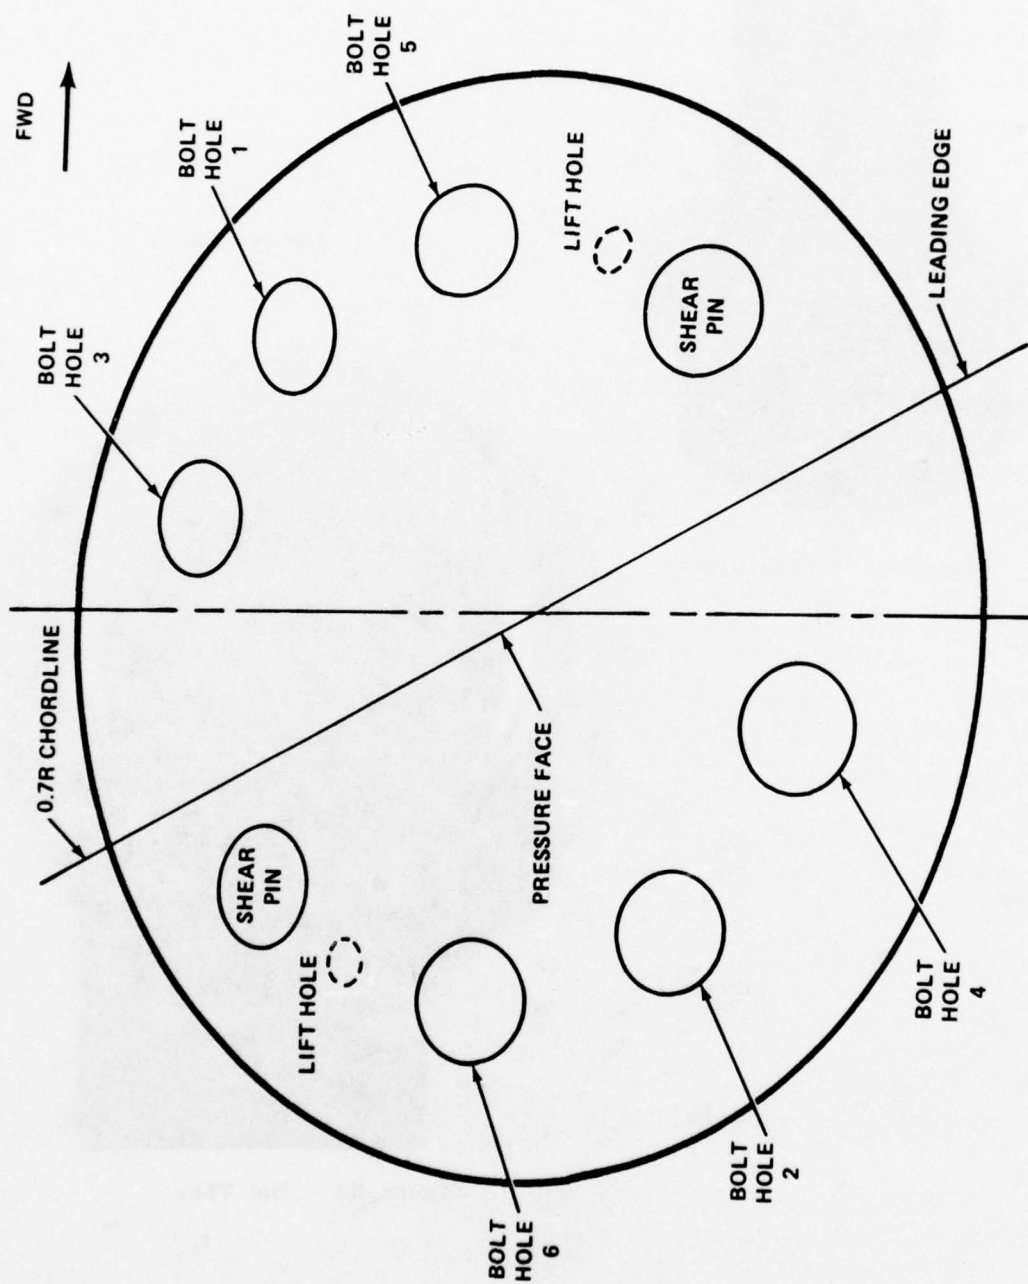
Layout of Propeller Blade Palm/Crank Disk
